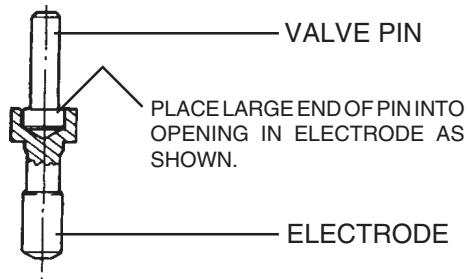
Assembly of PT-27 Torch Front End Parts
